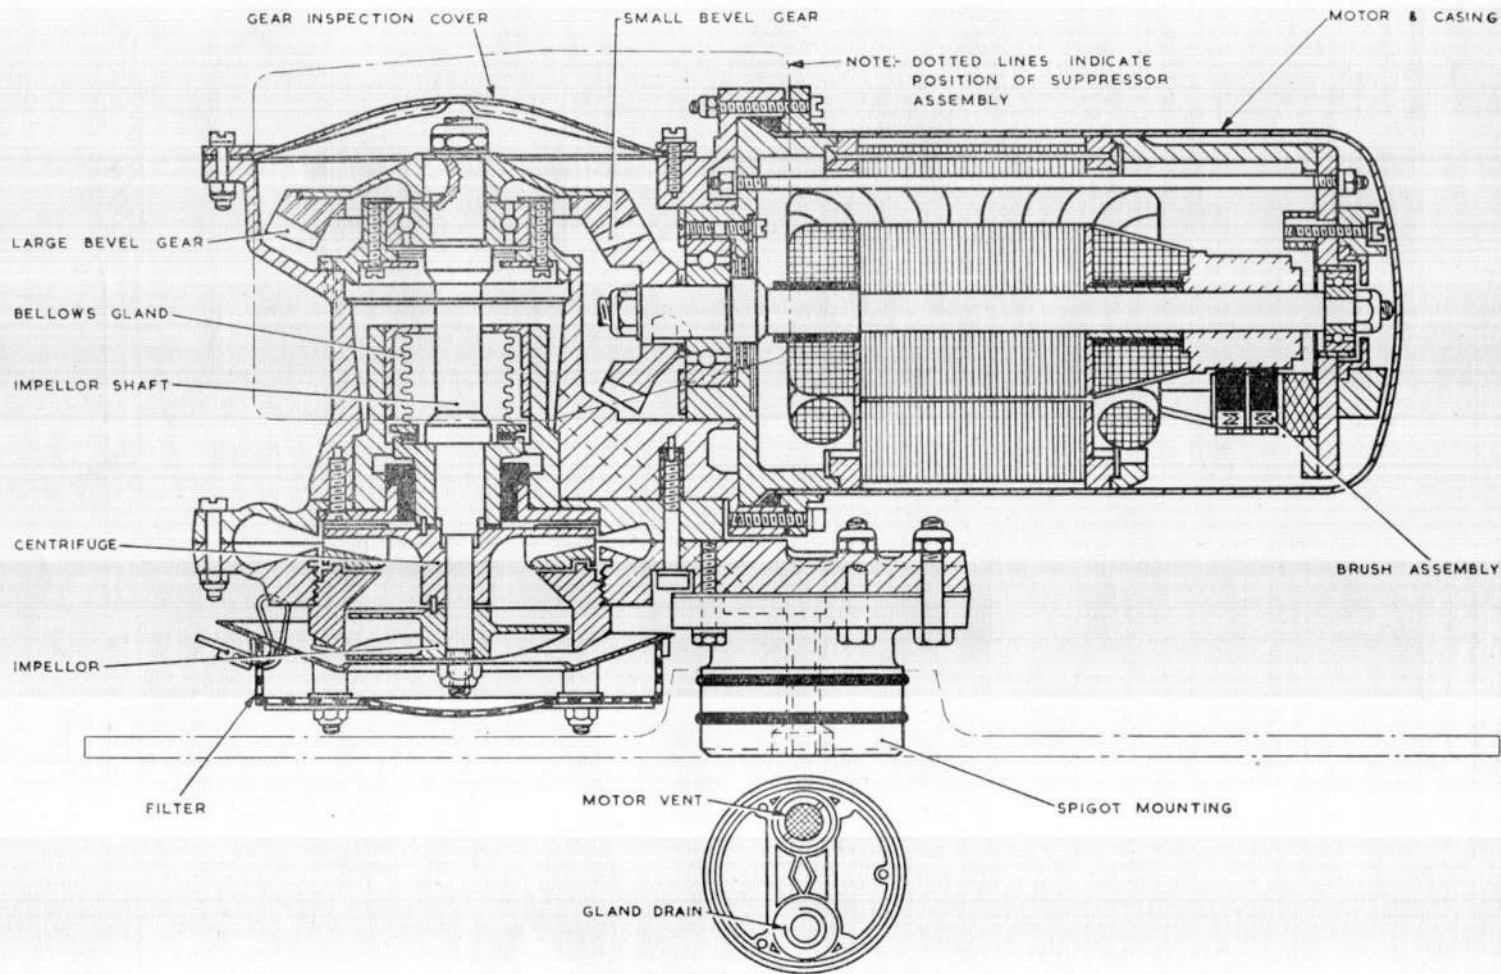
Sectional view of bottom flush mounting type fuel pump with right angled drive
